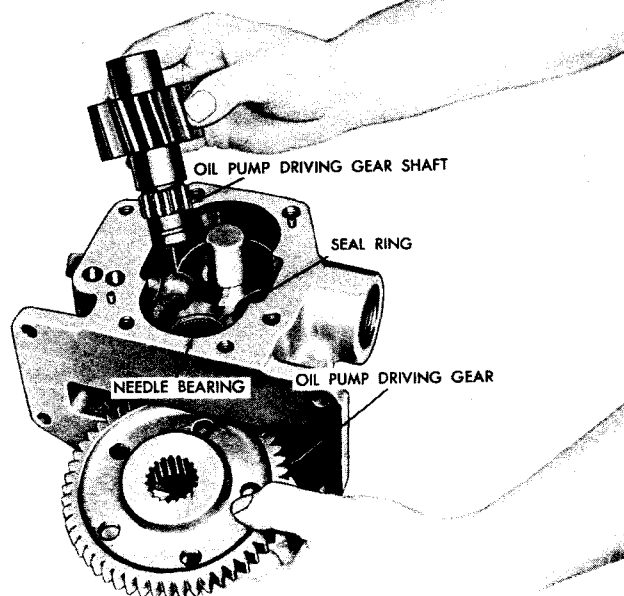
Removing (or installing) oil pump driving gear and shaft
